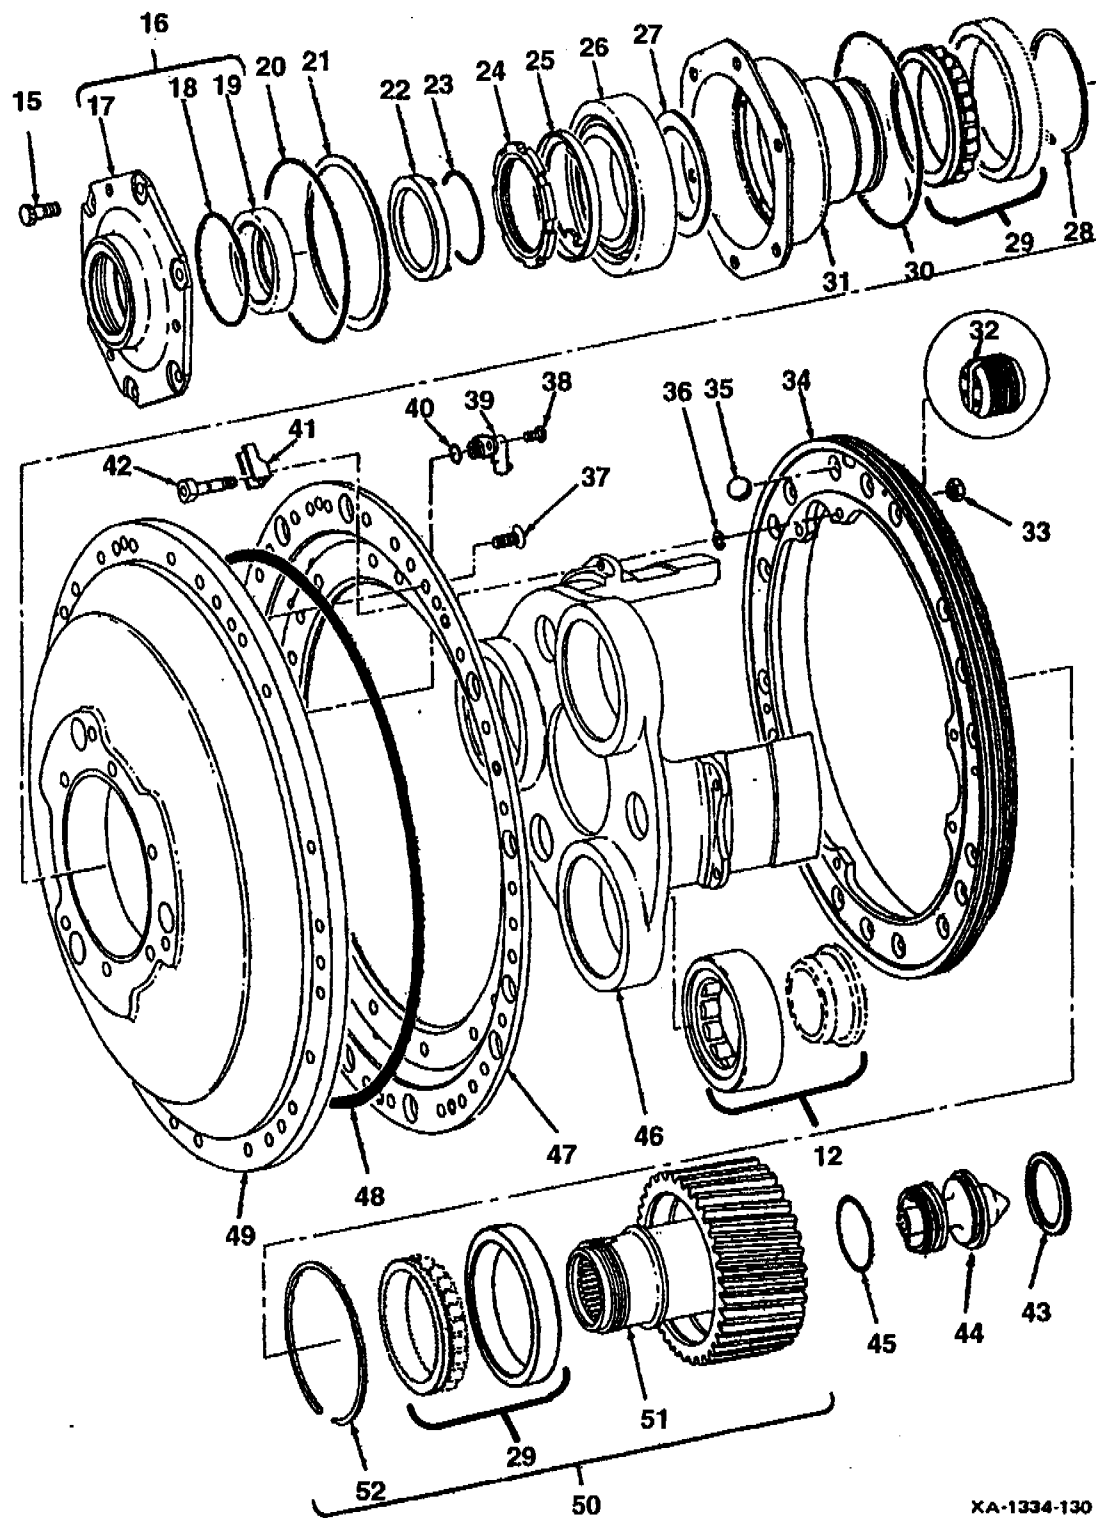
Output Reduction Carrier and Gear Assembly (1-030-350-08/12/18) (T53-L-13B, -703)
